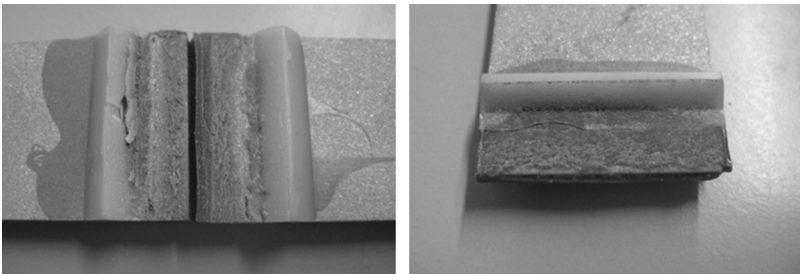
Fracture surfaces of mixed adhesive joints with a taper.
